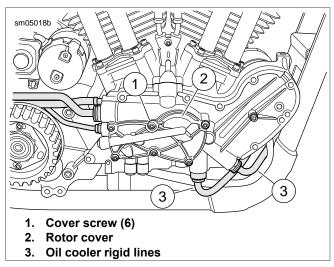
Oil Pump Rotor Cover: XR 1200X
